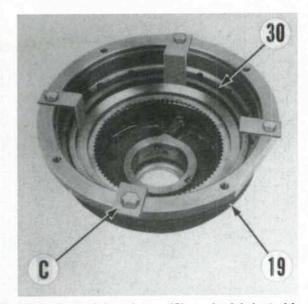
Restraining clamps (C) can be fabricated from angle iron and installed as shown to compress underdrive clutch return spring when removing and installing snap ring (30) from planetary housing (19).
